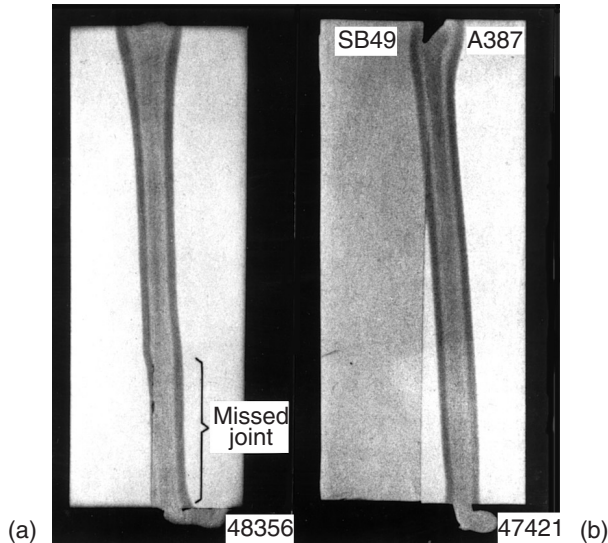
Missed joints in electron beam welds in 150-mm-thick steels: (a) 2.25Cr-1Mo steel with a transverse flux density of 3.5 G parallel to joint plane; (b) SB (C-Mn) steel and A387 (2.25Cr-1Mo) steel. Reprinted from Blakeley and Sanderson (17). Courtesy of American Welding Society.
